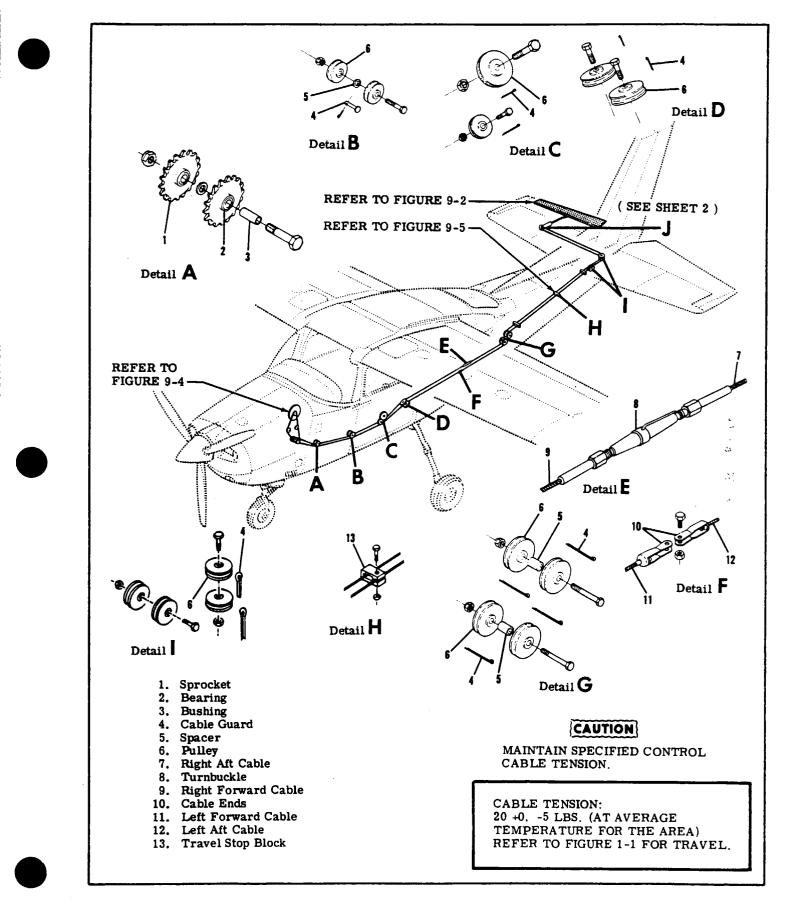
Elevator Trim Tab Control System (Sheet 1 of 2)
